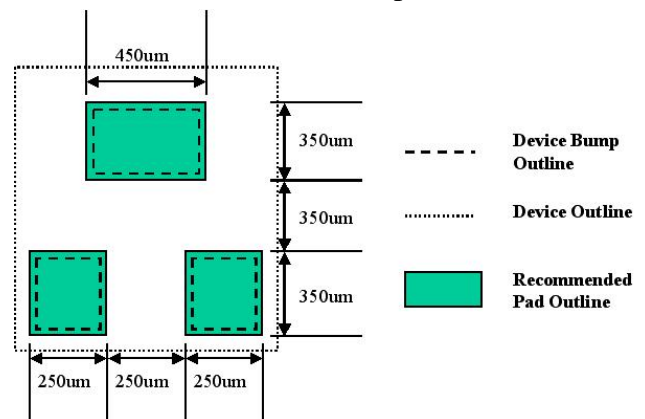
Diagram showing recommended solder mask defined PCB pad dimensions (drawing not to scale).
